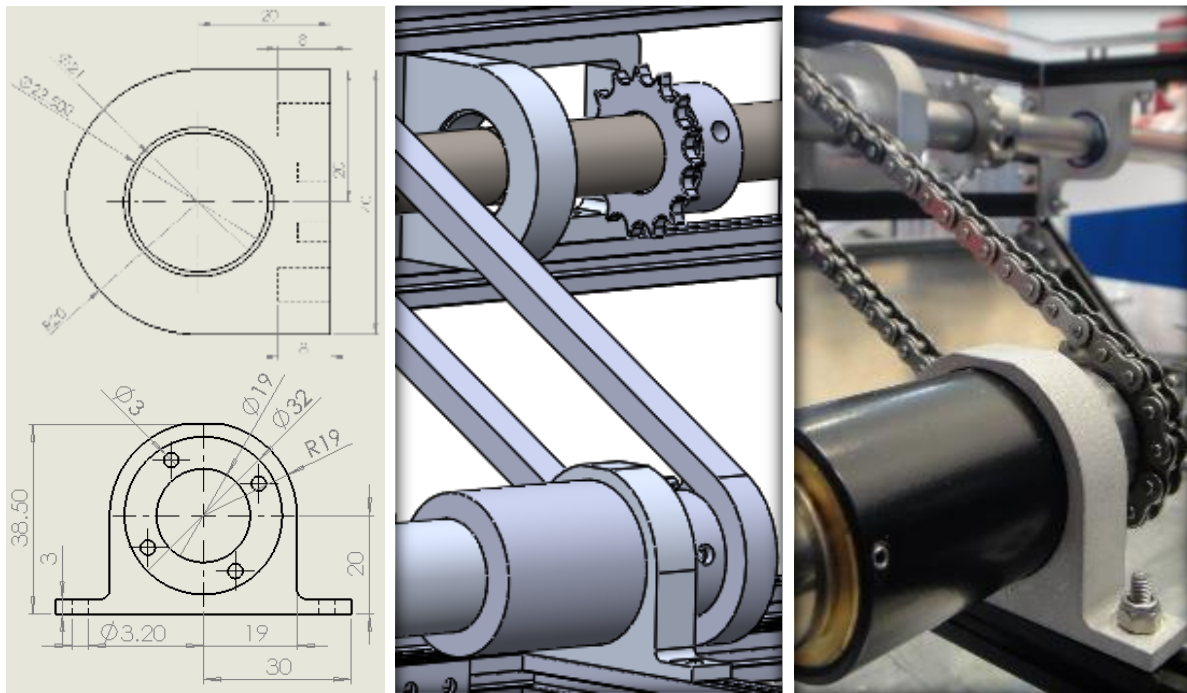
Technical drawings, accompanying CAD and finished parts of Orion
